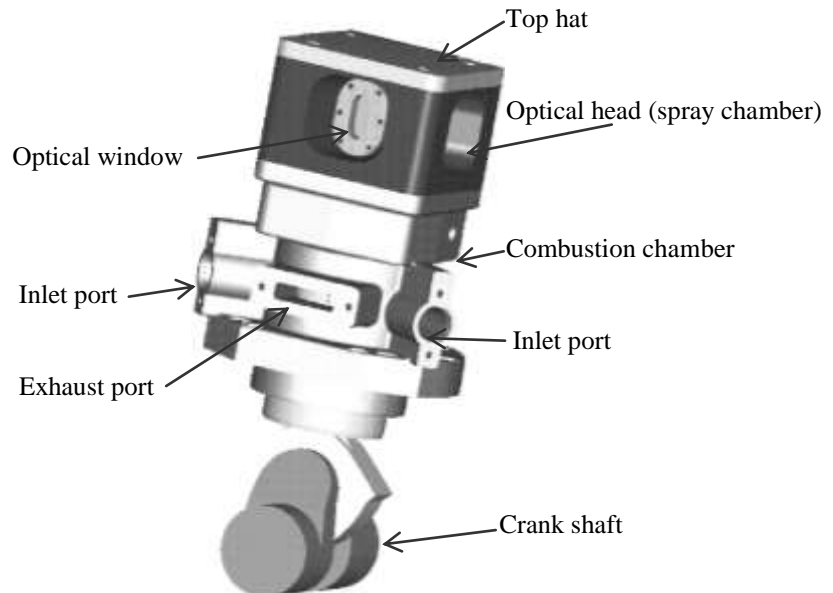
CAD drawing of the rapid compression machine, Proteus
